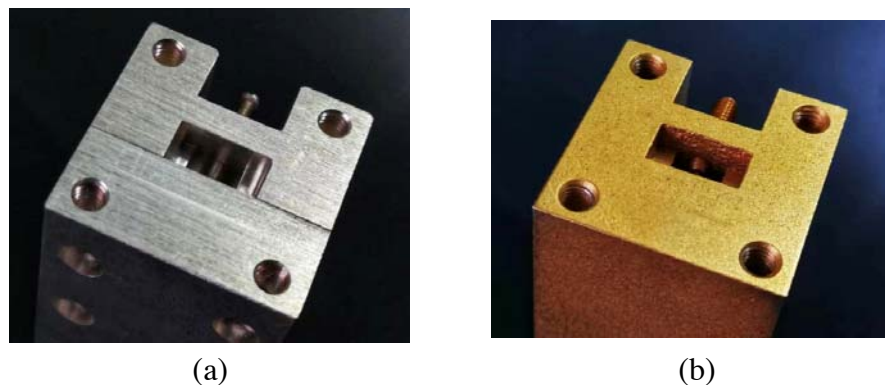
presents a photograph of the fabricated waveguide filter using the DMLS process. Unlike the CNC machined waveguide filter, it can be observed that the waveguide filter is printed as a whole piece, and it is free from assembly, i.e., no assembly screws and/or alignment pins are needed. Therefore, the DMLS printed waveguide filter has full advantages in terms of having a more convenient integration and with less materials than those of the CNC machined waveguide filter.
